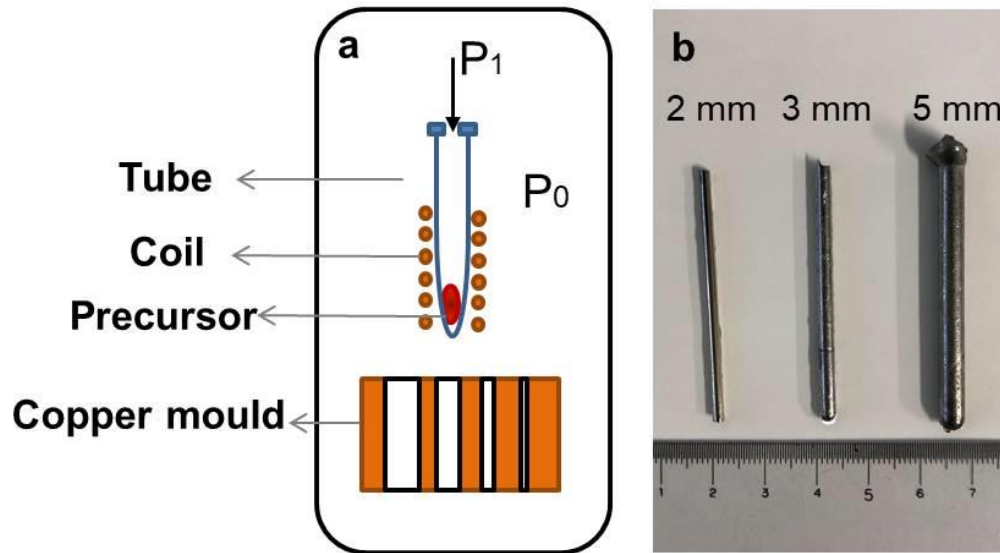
The illustration of injection-casting (a) and rod samples with different diameters (b) prepared by injection-casting.
